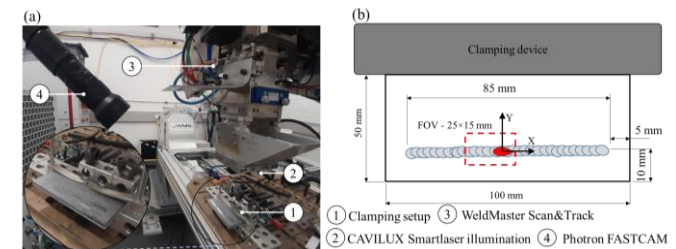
(a) welding equipment; (b) representation of the self-restraint test rig.
